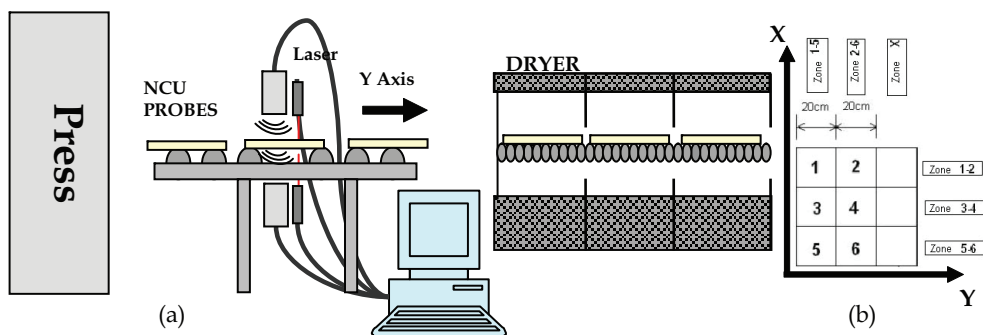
(a) Schematic drawing of the on-line installation; (b) Reference system for the inspected tile zones
